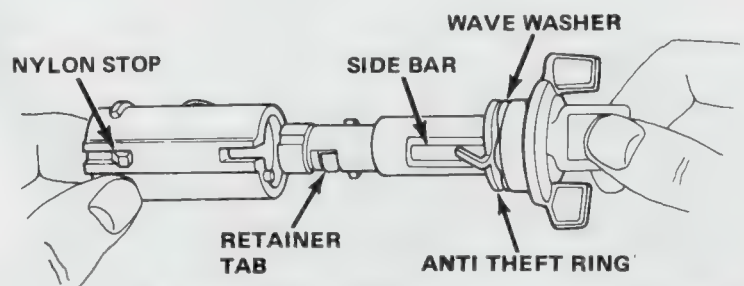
H-38 Assembling Lock Cylinder and Sleeve
